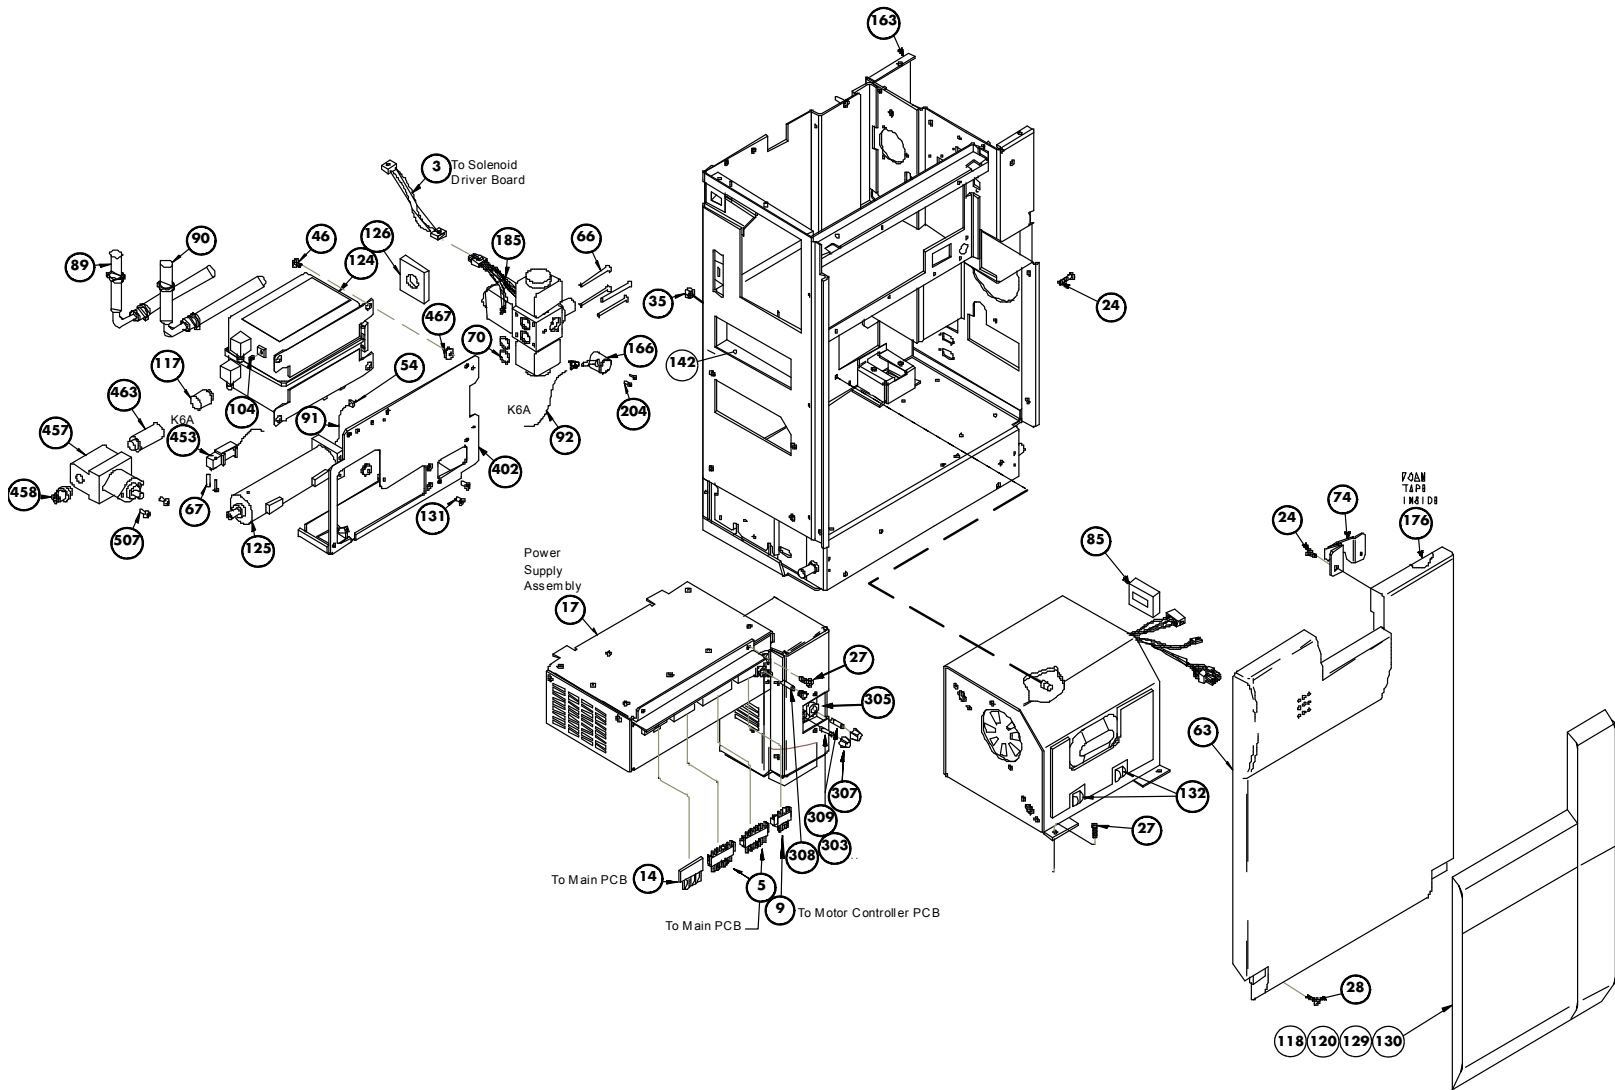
Isometric Drawing, Chassis, Left Side, Bottom
